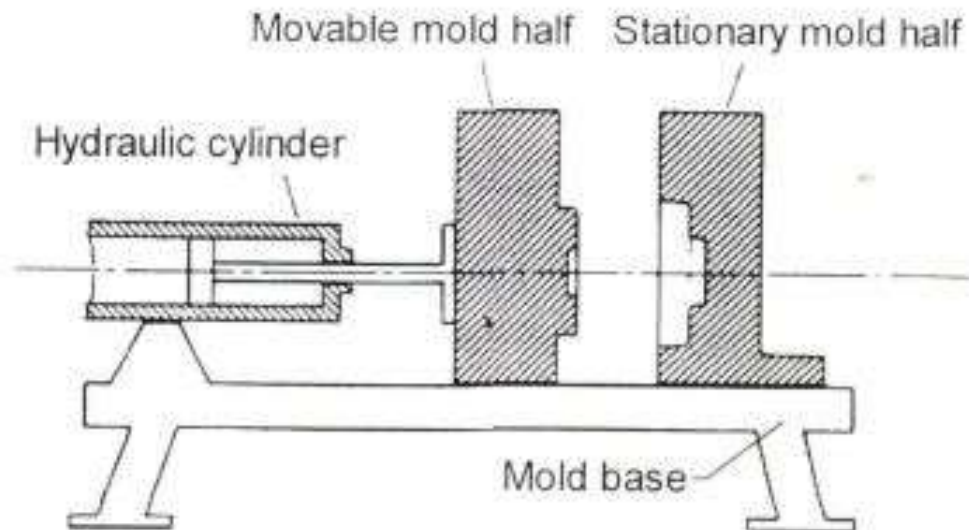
Schematic drawing of straight-line permanent-mold machine equipped with two-piece deep-cavity die
